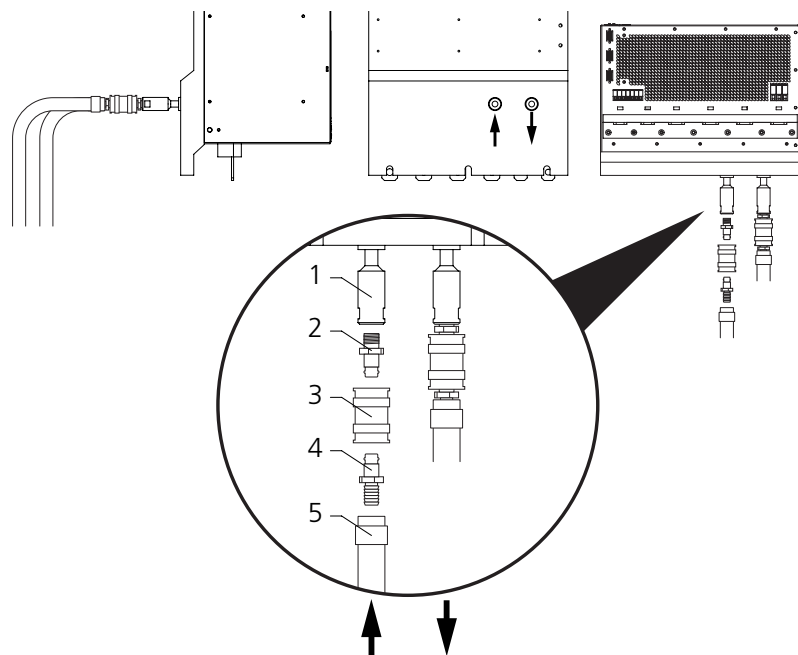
Dimensional drawing of housing with liquid cooling, schematic representation for BG7
